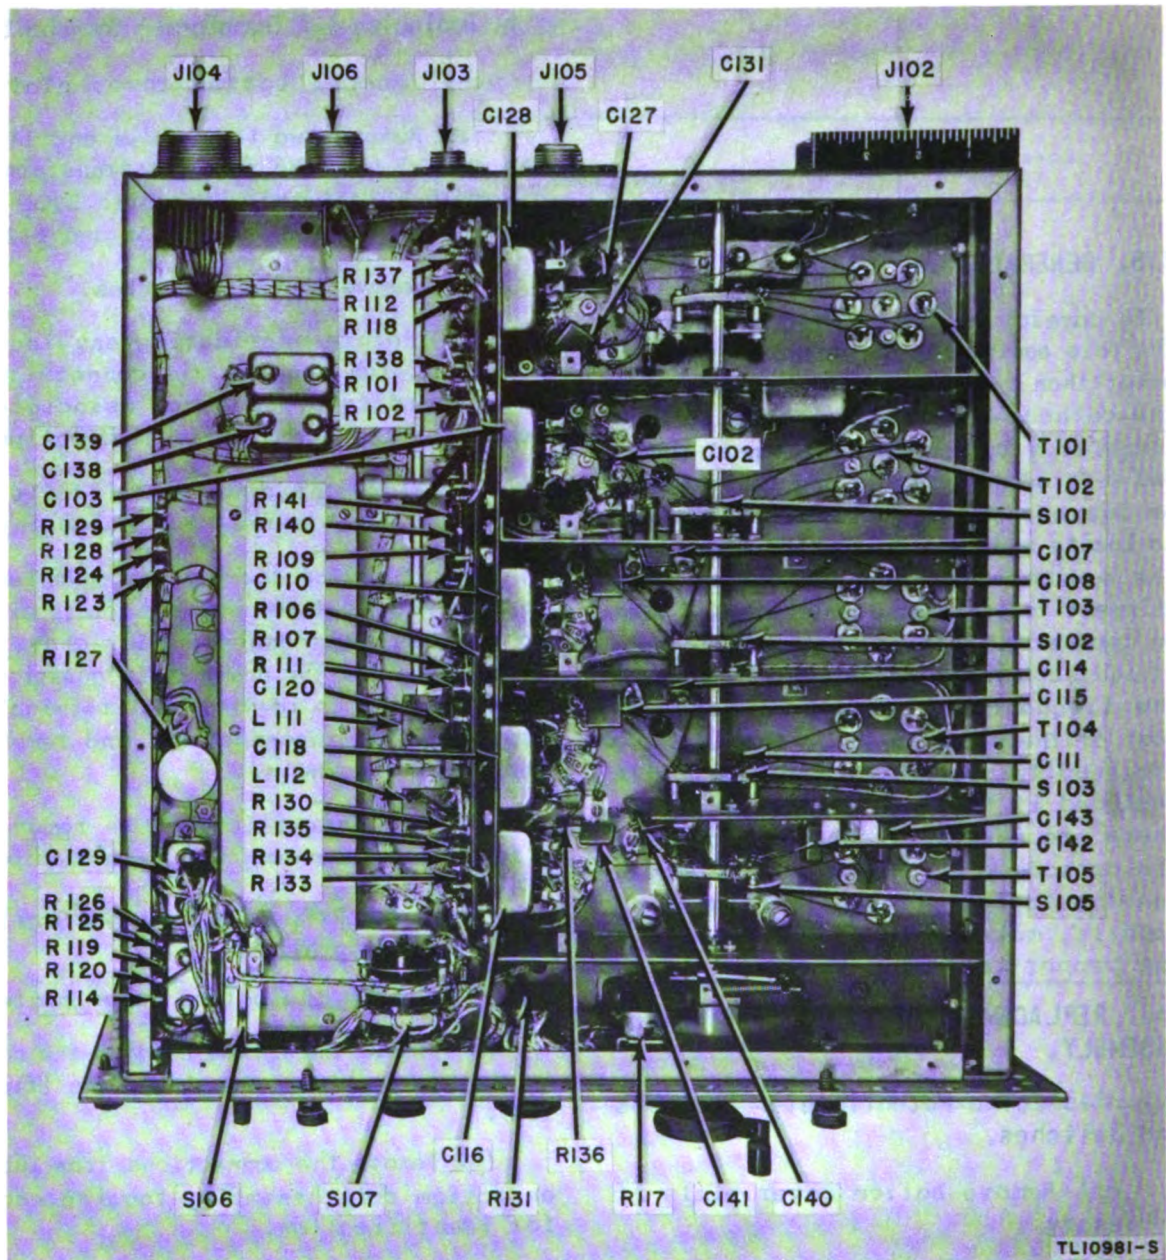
Modulator section of Radio Receiver Assembly R-128/CRD-3, bottom view showing parts location.
